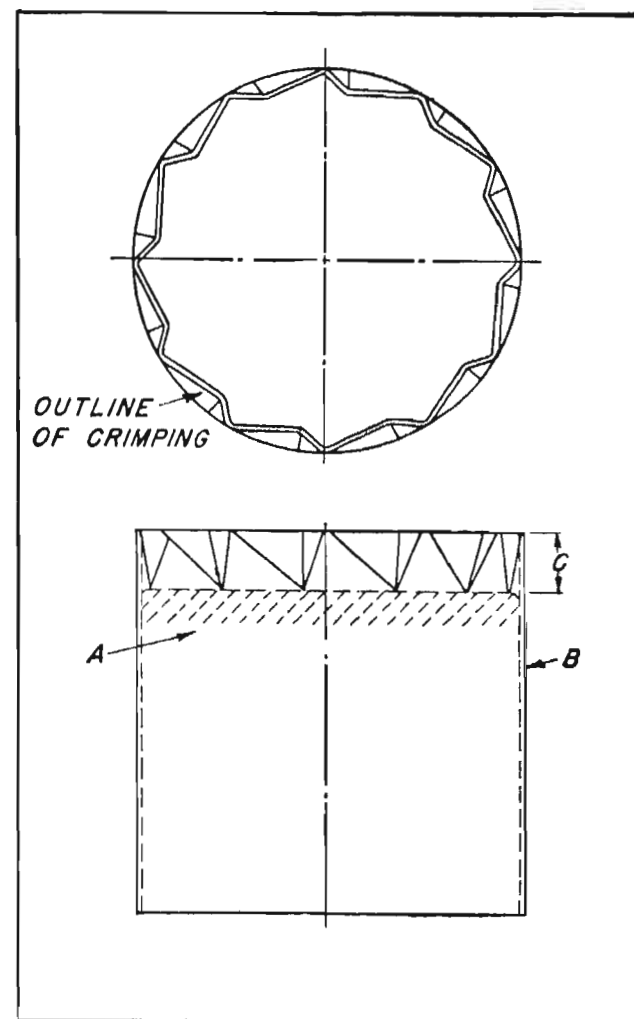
Twelve Equally Spaced Crimps are Produced in Heavy Paper Cylinder by Mechanism Shown in Fig. 10.
